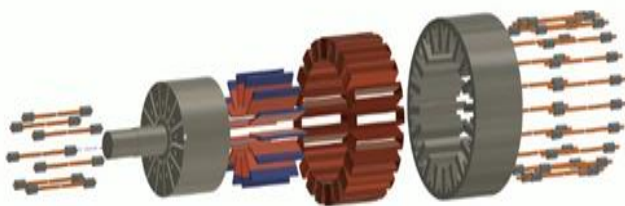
Exploded view of the symmetrical machine with 20 open-slot stator, 20 tooth concentrated coils, 14 internal magnets and statoric and rotoric heat pipes, prototype 2
